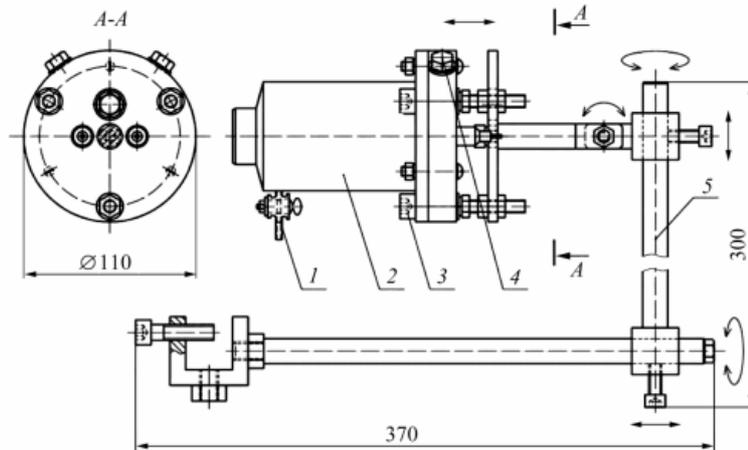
Example of mounting a portable three-electrode electrochemical device:
